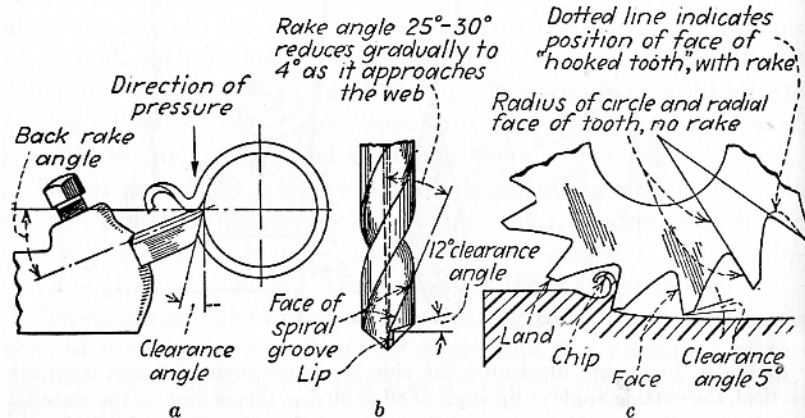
Shows clearance and rake on three much-used machine-shop cutting tools: (a) lathe tool, (b) twist drill, and (c) milling cutter.
